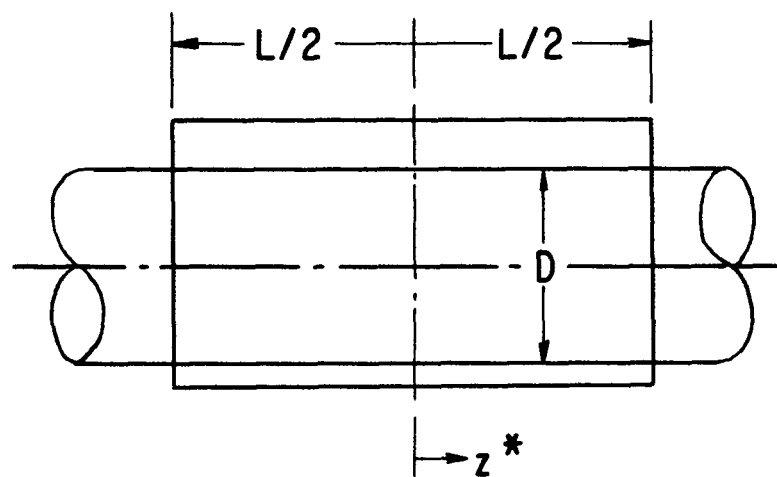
Cylindrical Journal Squeeze-Film Bearing Configuration
